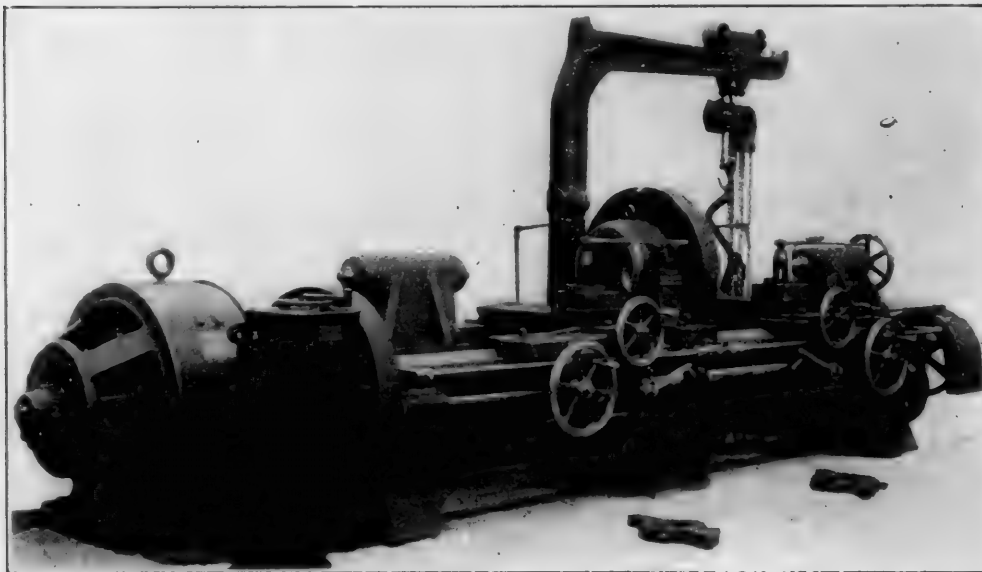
NILES HEAVY DOUBLE AXLE LATHE—MOTOR DRIVEN.
